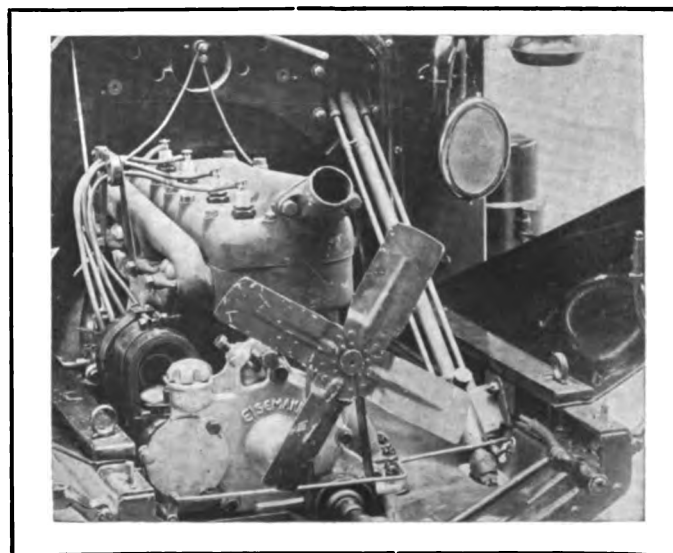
Showing the Eisemann Magneto Attachment for Ford Motors Installed—A Quiet Drive, Well Lubricated, Is Among Its Practical Features.
